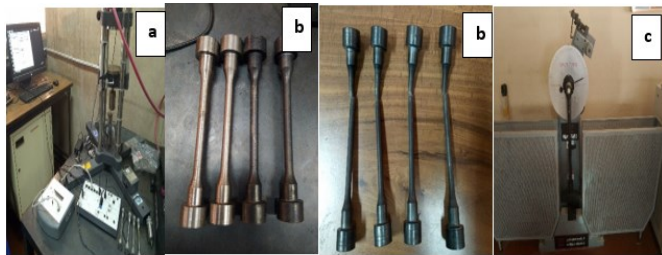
(a) Tensile Test Equipment; (b) Tensile Test Samples; (c) Impact Test Machine.
